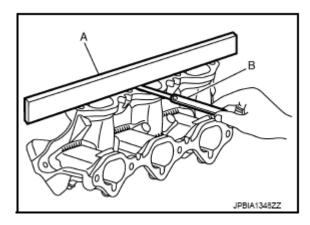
Checking Surface Distortion Of Intake Manifold Mating Surface Using Straightedge And Feeler Gauge
